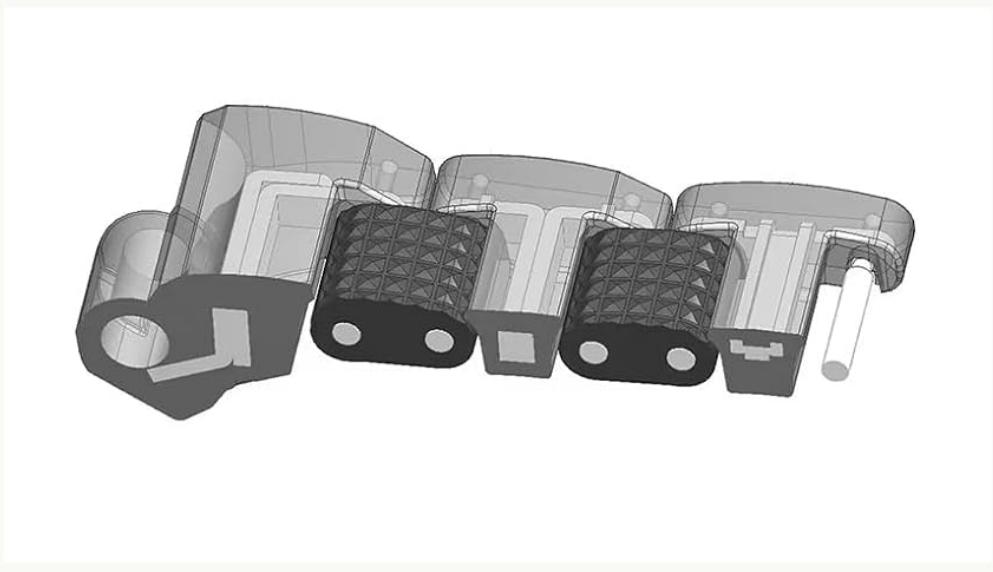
Exploded view of the extension mechanism components, showing the stainless steel and fine resin parts that enhance durability and adjustability.
